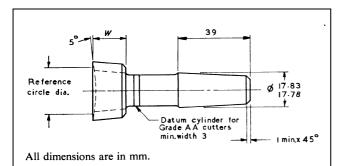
(c) — No. 2 Morse stub taper shank gear cutter
